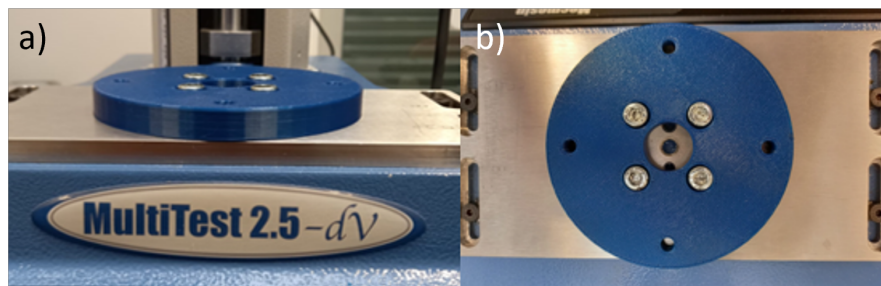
BB machine inferior support: a) inclined front view; b) top view.
